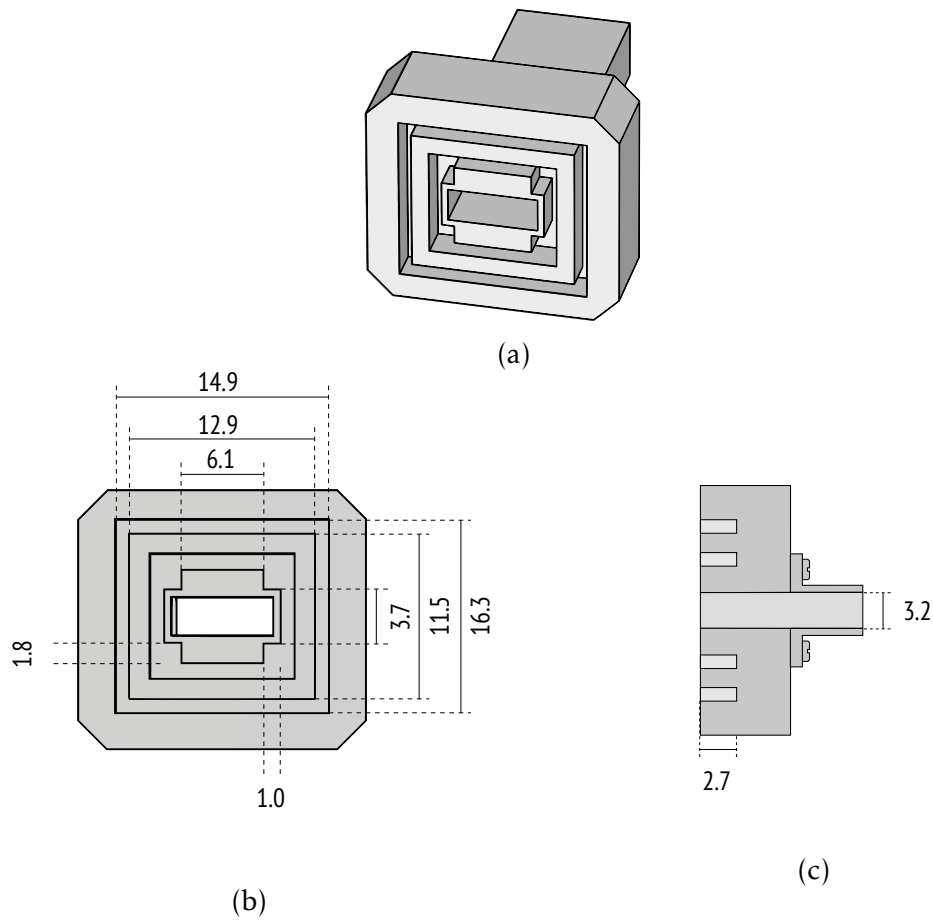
(a) Perspective view, (b) front view and (c) cross-sectional view of the proposed choke flange (all dimensions in mm).
